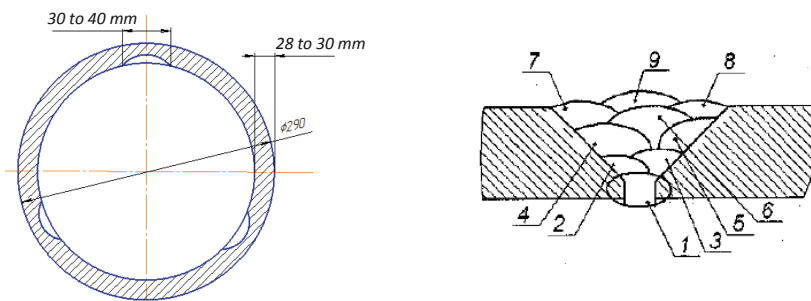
Layout of tack welds and multi-pass weld beads. *Source:* National Agency for Testing and Welding (NAKS) approved technology
